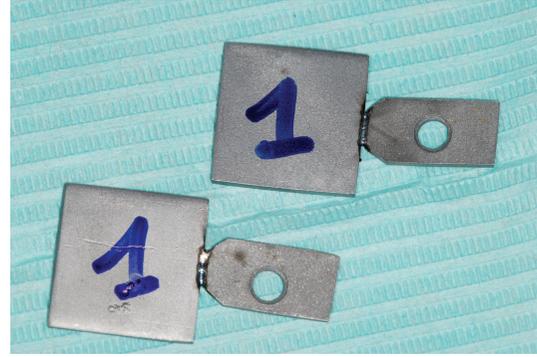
Plates of group A welded by in-lab Nd : YAG laser welding.
